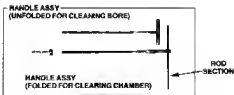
BORE AND CHAMBER CLEANING TOOLS
